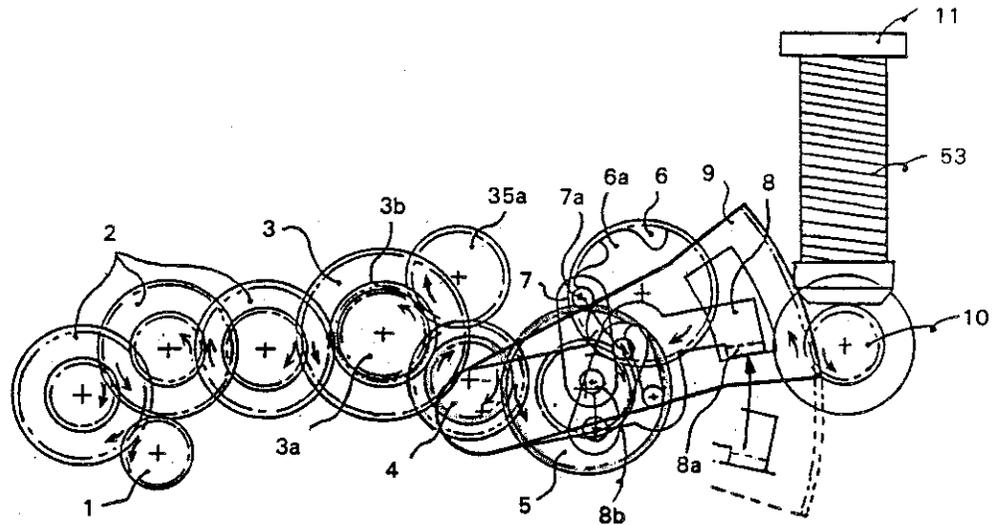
Winding (Lower) Assembly During Reverse Rotation (Winding)
